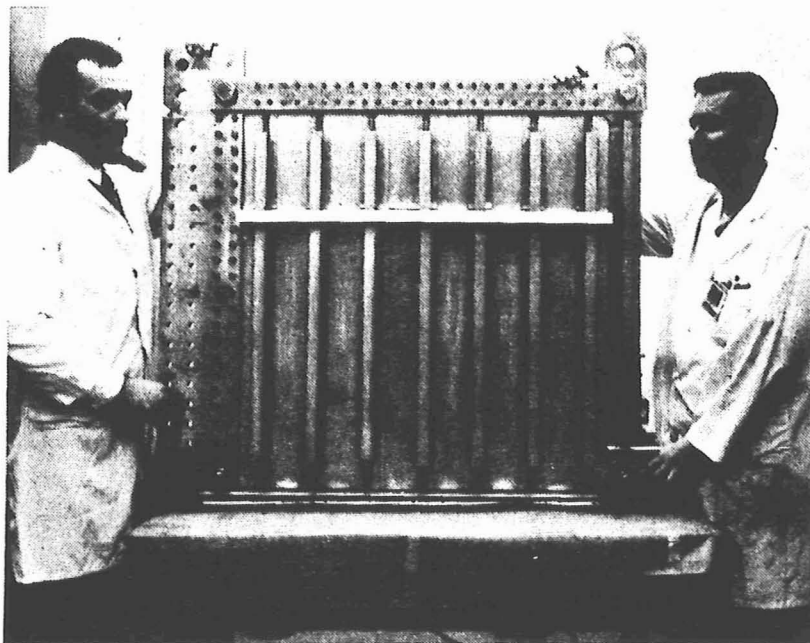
Frame Side of Completed Stiffened Panel and Test Fixture Assembly (129951B)
